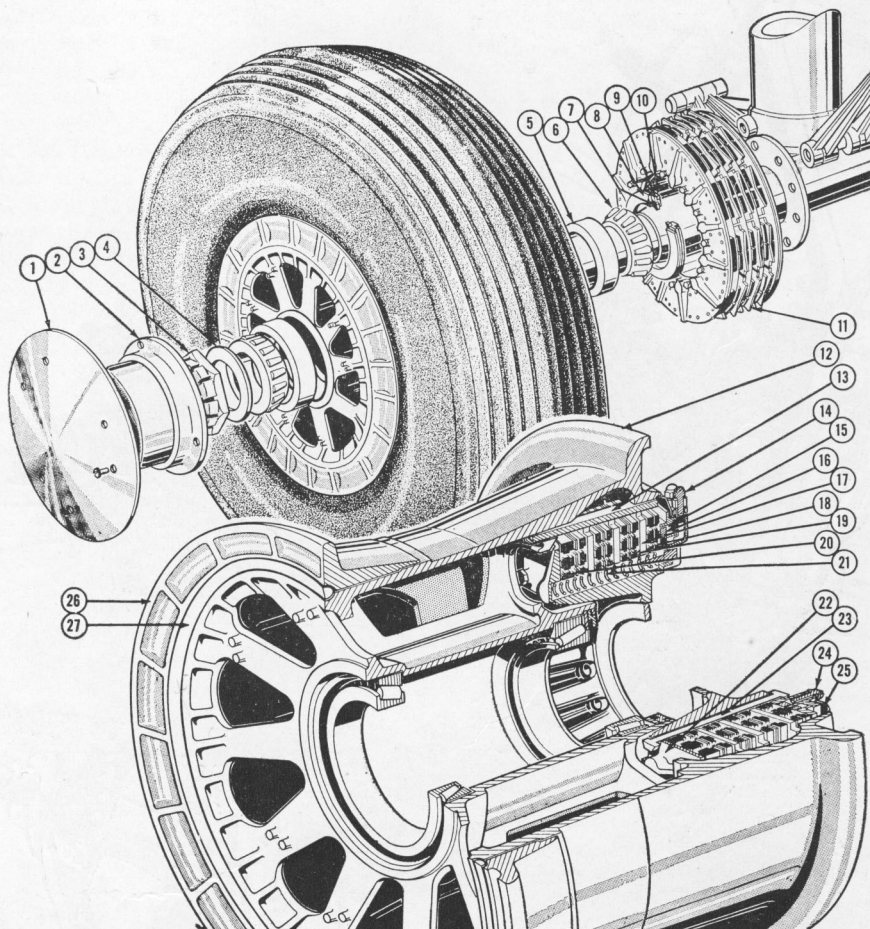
The main gear wheel and brake installation of the North Star include: (1) fairing assembly; (2) hub cap; (3) retainer nut; (4) washer; (5) bearing cap; (6) bearing cups and rollers; (7) felt washer; (8) washer; (9) retainer cup; (10) snap ring; (11) brake assembly; (12) wheel and bearing cup assembly; (13) rotor drive key; (14) bleeder screw assembly; (15) piston cups; (16) piston; (17) rotor segment; (18) lining; (19) stator plate; (20) pressure plate assembly; (21) piston return spring; (22) backing plate assembly; (23) drive sleeve and bolt; (24) adjusting screw; (25) carrier assembly; (26) wheel flange; (27) flange retainer.
